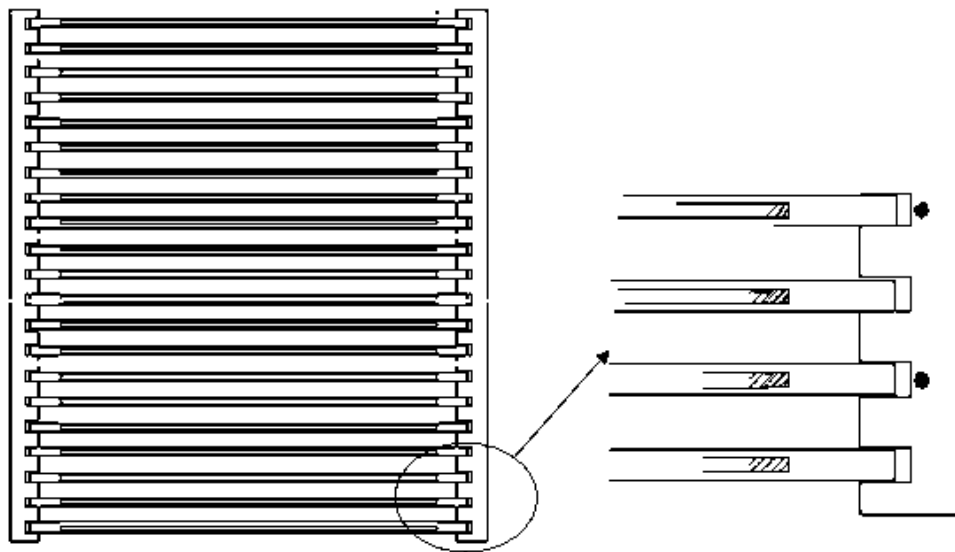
Cutaway view for Type 2 and Standard Fuel Assembly which consists of 21 fuel plates and 20 cadmium wires as burnable poison.
